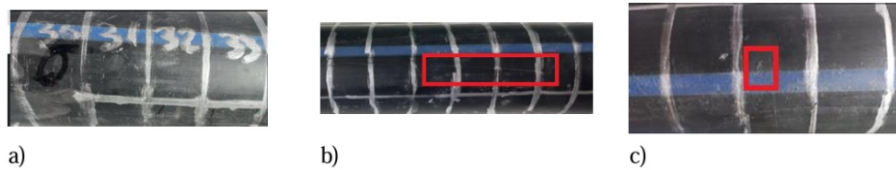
Defects of type lack of material identified on the outer surface of the PE polyethylene pipe: a) imprint, b) scratch; c) microcrack
